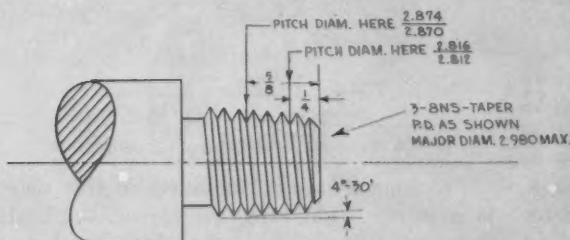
Method suggested for designating threads having special tapers. Pitch diameter measurements are given at fixed distances from the end of the thread.
